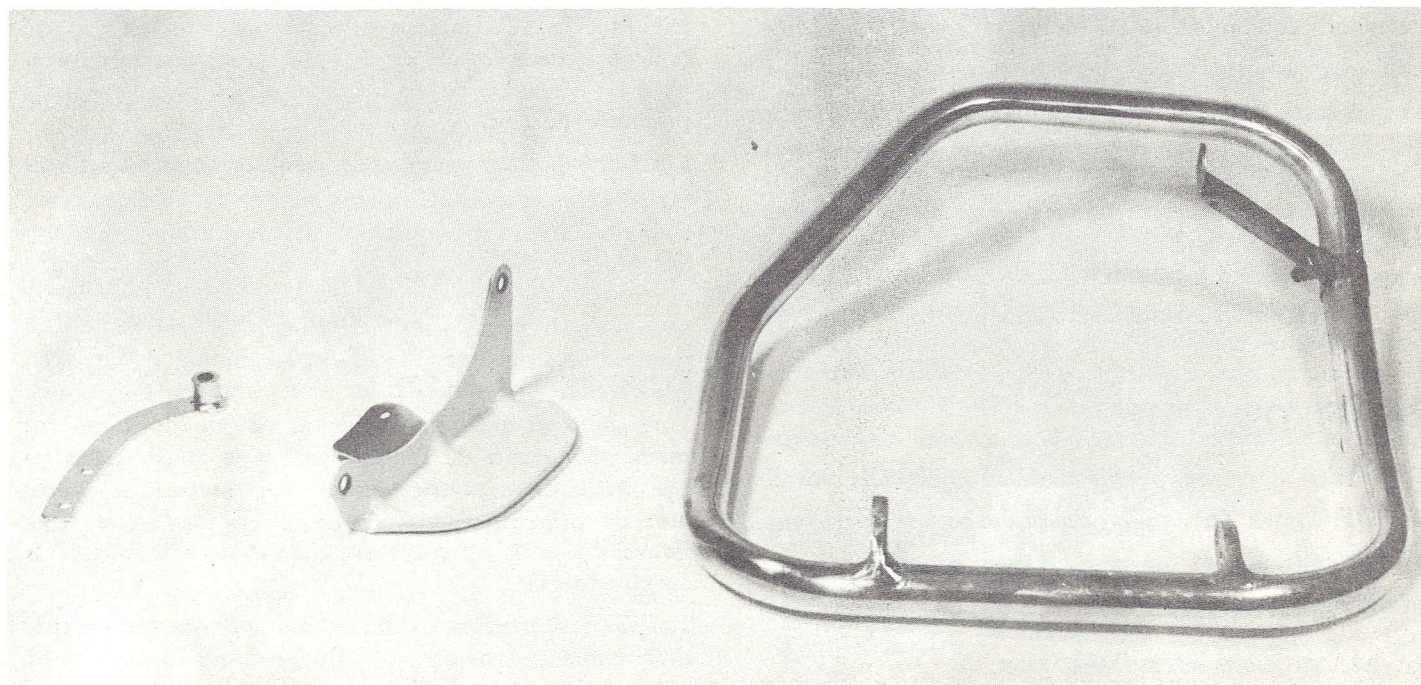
OPTIONAL EQUIPMENT - ÉQUIPEMENT FACULTATIF
